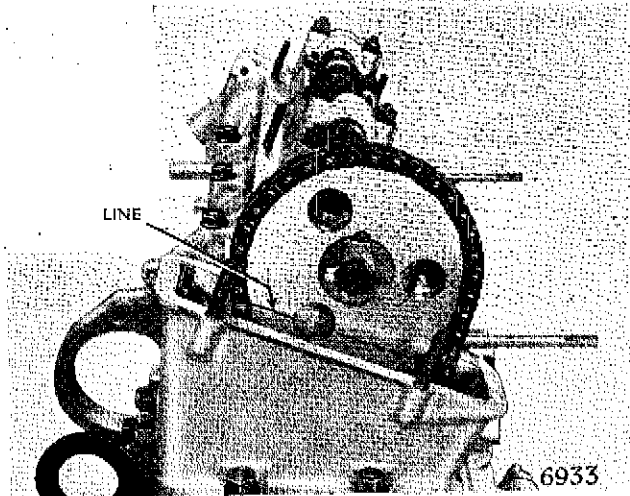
Camshaft sprocket marking line position for No. 1 TDC firing position
